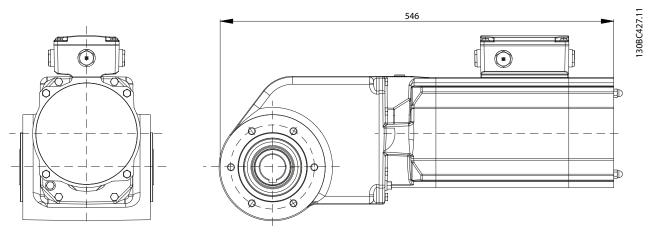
Dimensions: OneGearDrive with Mechanical Brake Option
